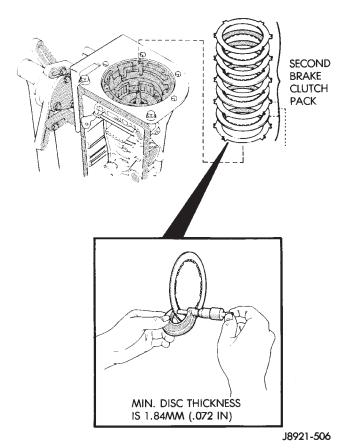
Remove/Measure Second Brake Clutch Disc Thickness
